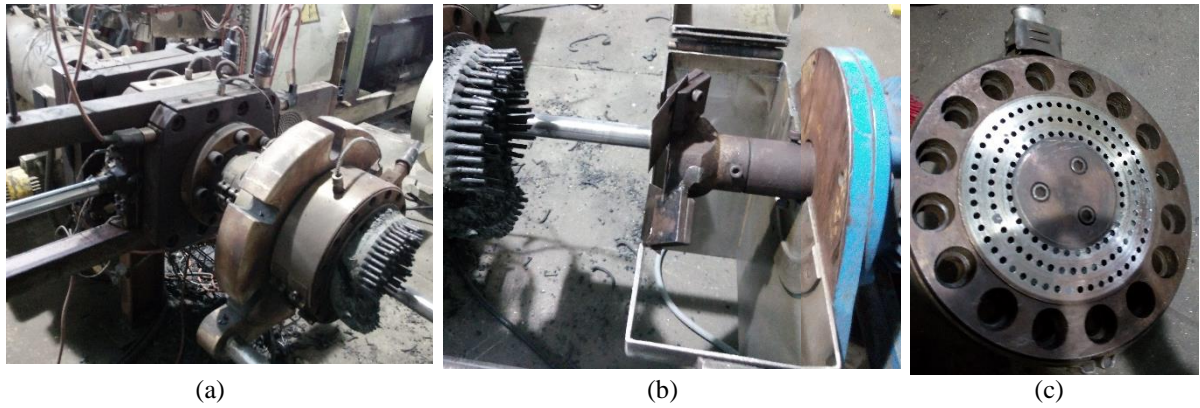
(a) Detail of the extruder; (b) Cutting blades of the extruded material; (c) Extruder
